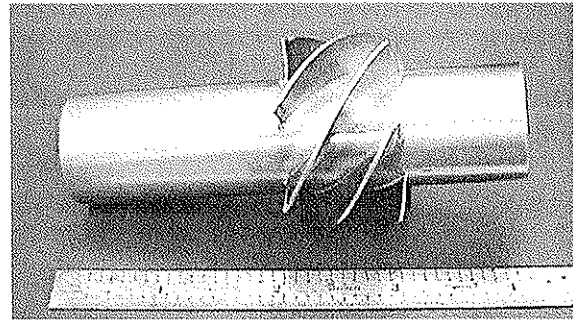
LC IN-625 fins built on pre-machined 316L stainless steel shaft.
